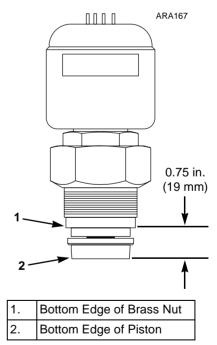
Stepper Motor and Piston Assembly with Piston in Fully Open Position
